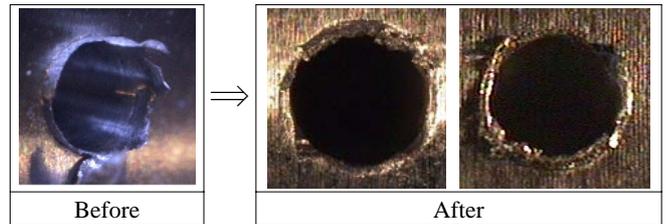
comparison between before and after deburring in 1mm drilling hole (9∅ beier tool)
